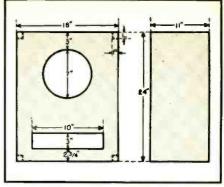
Construction details for building the associated speaker enclosure. Cabinet should be constructed of 56° plywood with corners braced with $1° \times 1°$ blocks of wood.
